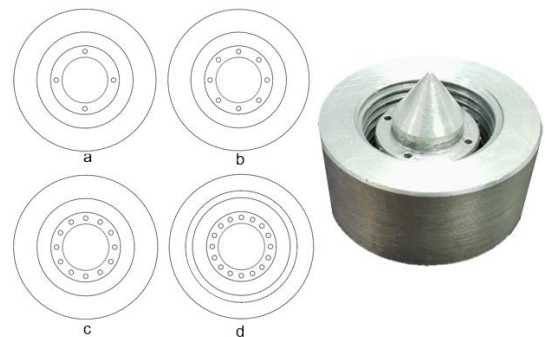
Four types of hot end designs, 16 holes, 12 holes, 8 holes and 4 holes
